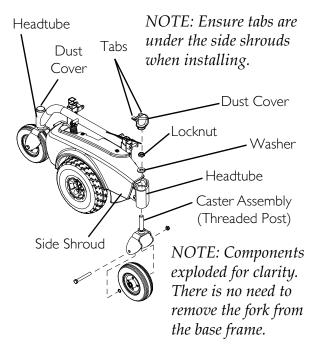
Removing/Installing the Front/ Rear Caster Assemblies
